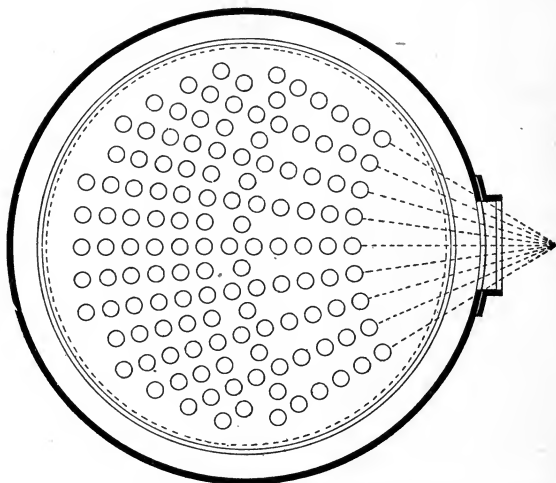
,736.—Detail of crown sheet of Reynolds boiler. The radial tube spacing facilitates cleaning the crown sheet.
